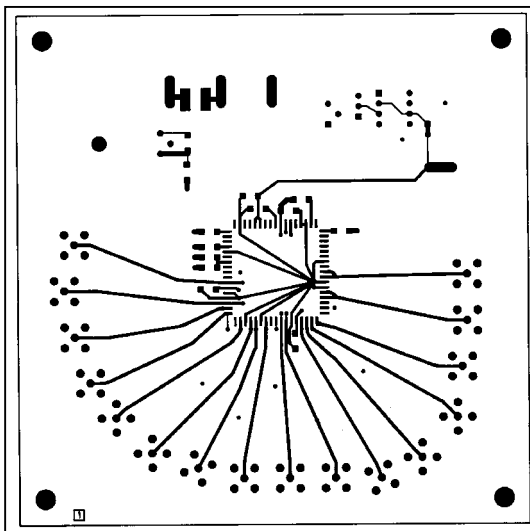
MAX555 EV Kit PC Board Layout—Component Side
